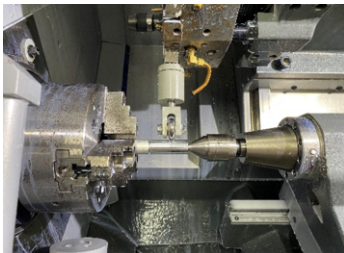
The installation of the burnishing tool on the CNC lathe machine.
